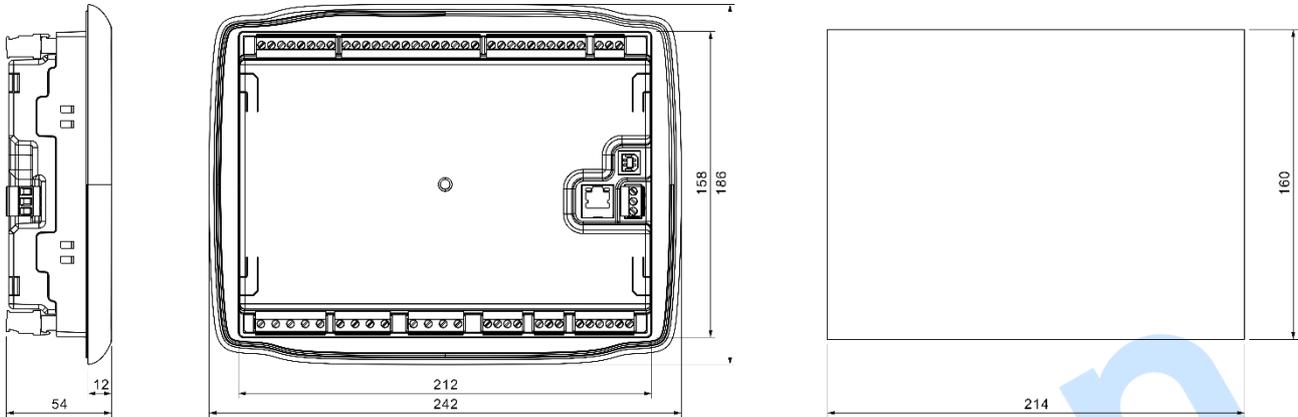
Overall Dimensions and Panel Cutout (Unit: mm)
